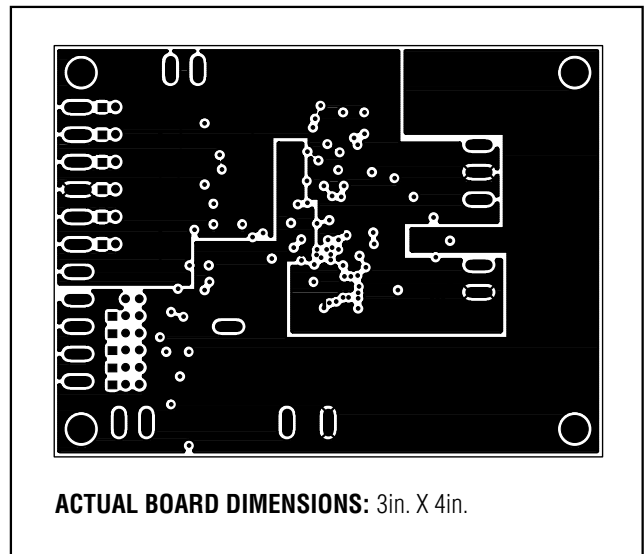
MAX1802 EV Kit PC Board Layout—VCC Layer 3
